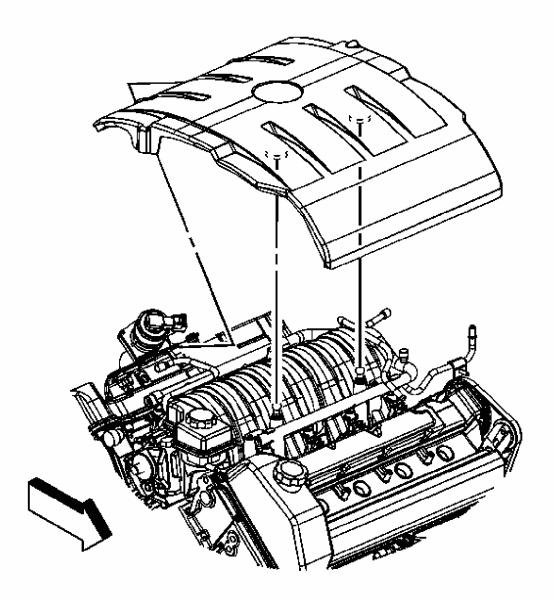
Identifying Fuel Injector Sight Shield Courtesy of GENERAL MOTORS CORP.
